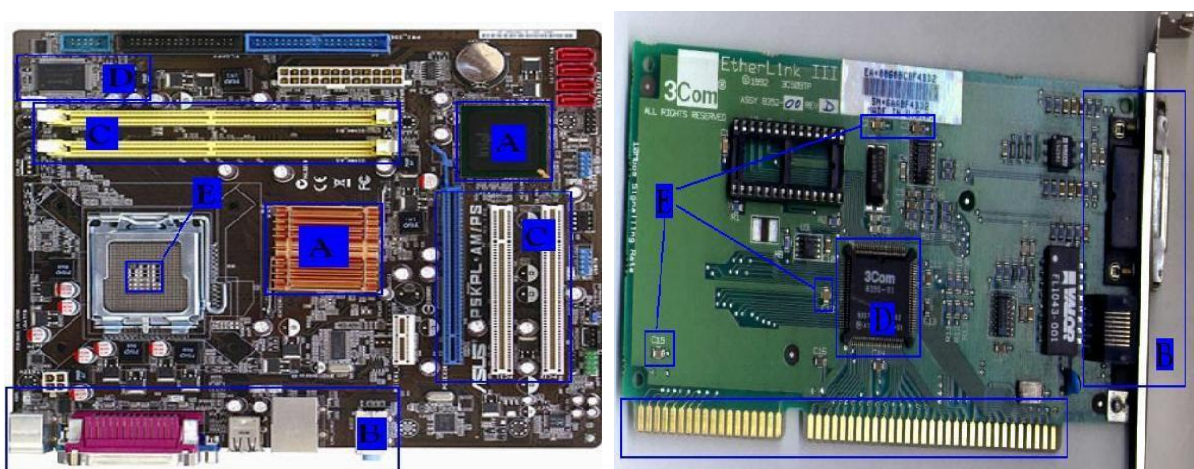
Printed Circuit Board (PC-Board) showing different components that will be extracted
